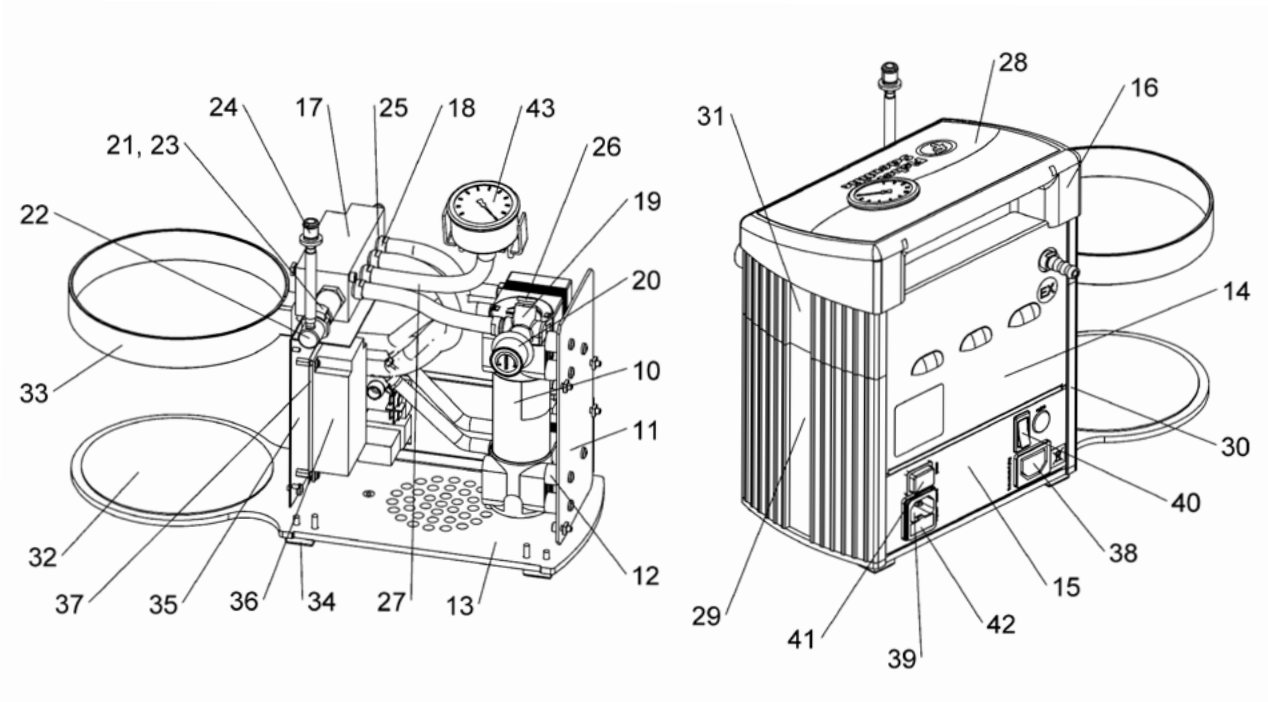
Explosion view (Aspiration Advantage System) Aspirator pump unit
